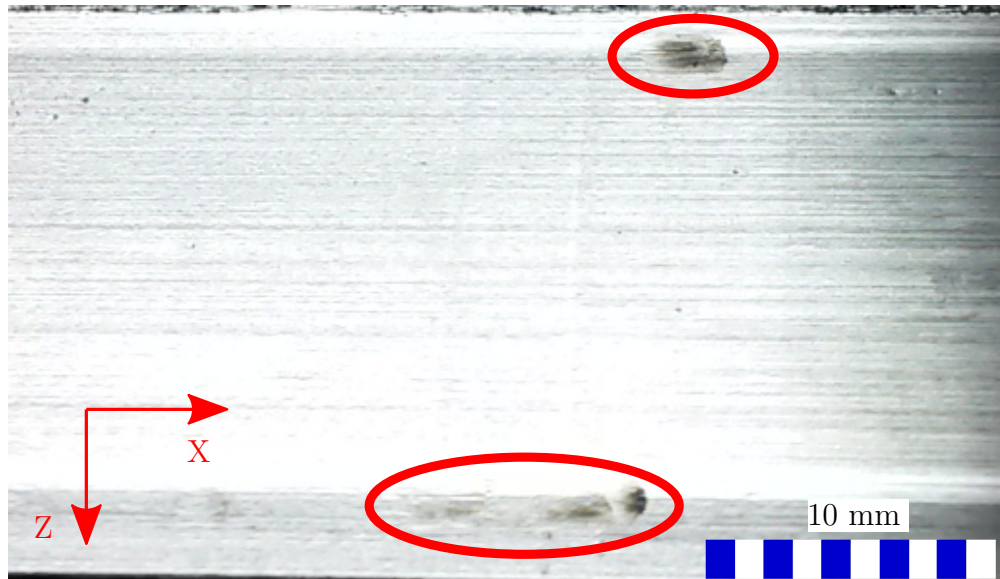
Photograph of a burned workpiece ground by a conventional profile grinding wheel. The damaged areas are circled. The absolute coordinates of the grinding machine are shown in the bottom-left corner.
